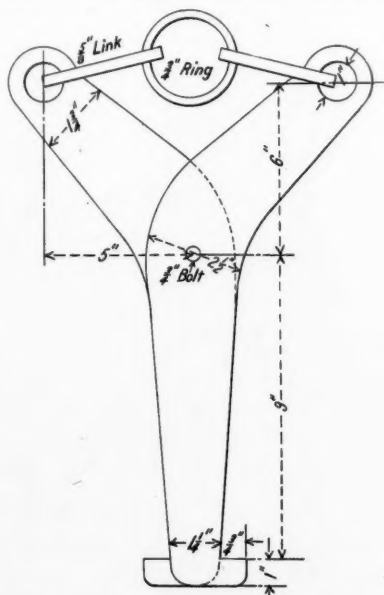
Device for Use in Drilling Out Staybolts.
